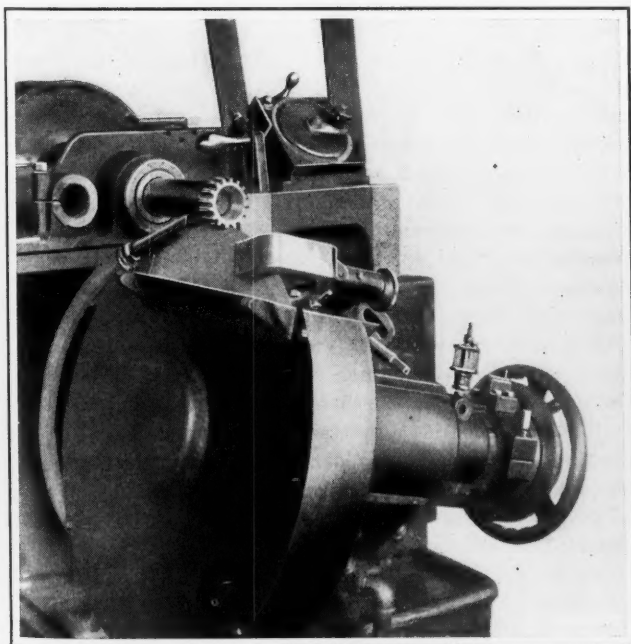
Close-up View, showing the Method of rolling the Gear Teeth over the Grinding Wheel
